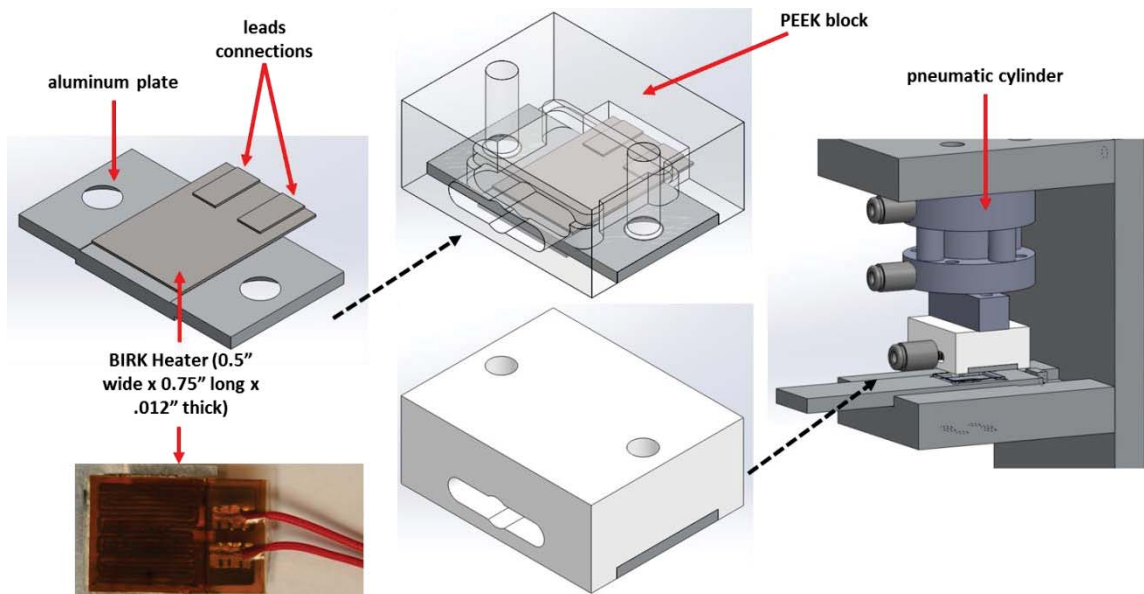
Birk thin-film heater and heater assembly (BK3546-10.5-L24-01)
